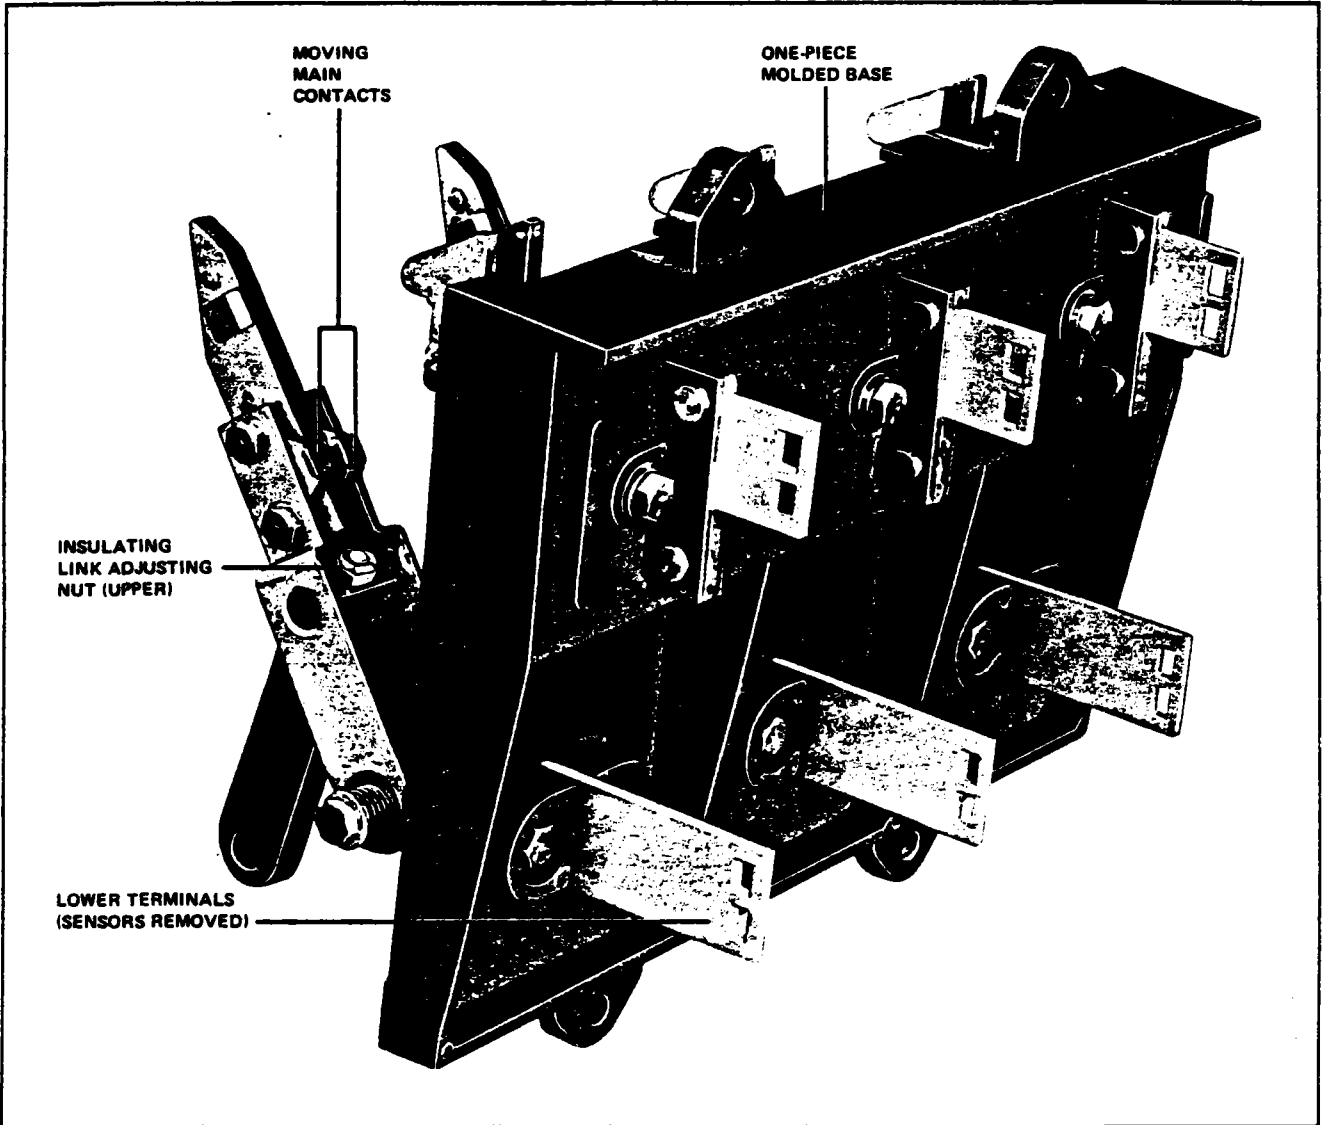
Type DS-206 Pole Unit Assembly - Rear View (384499)
